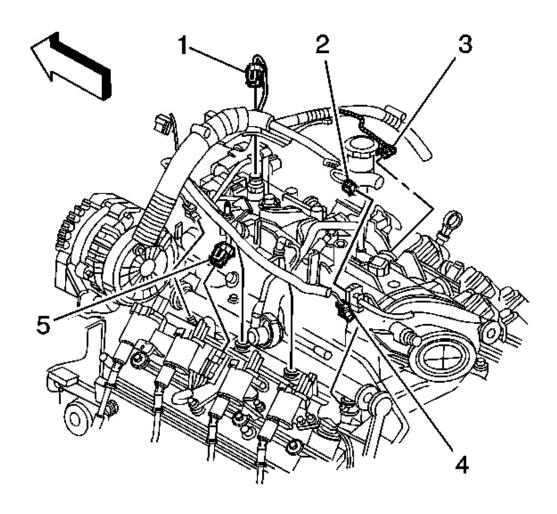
Top Of Engine Wiring Harness View Courtesy of GENERAL MOTORS CORP.
